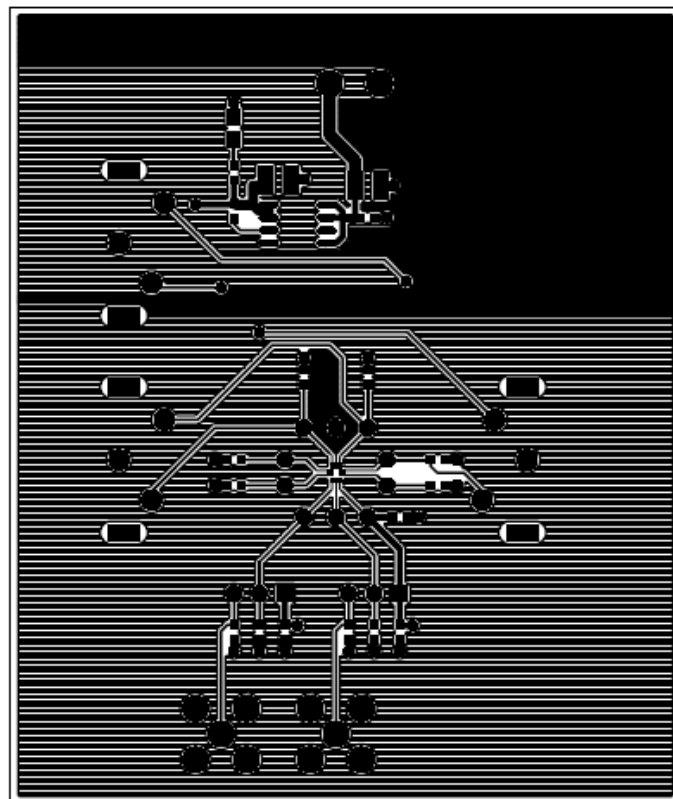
PCB Drawing Layer 1 (Top Layer of the Board)
